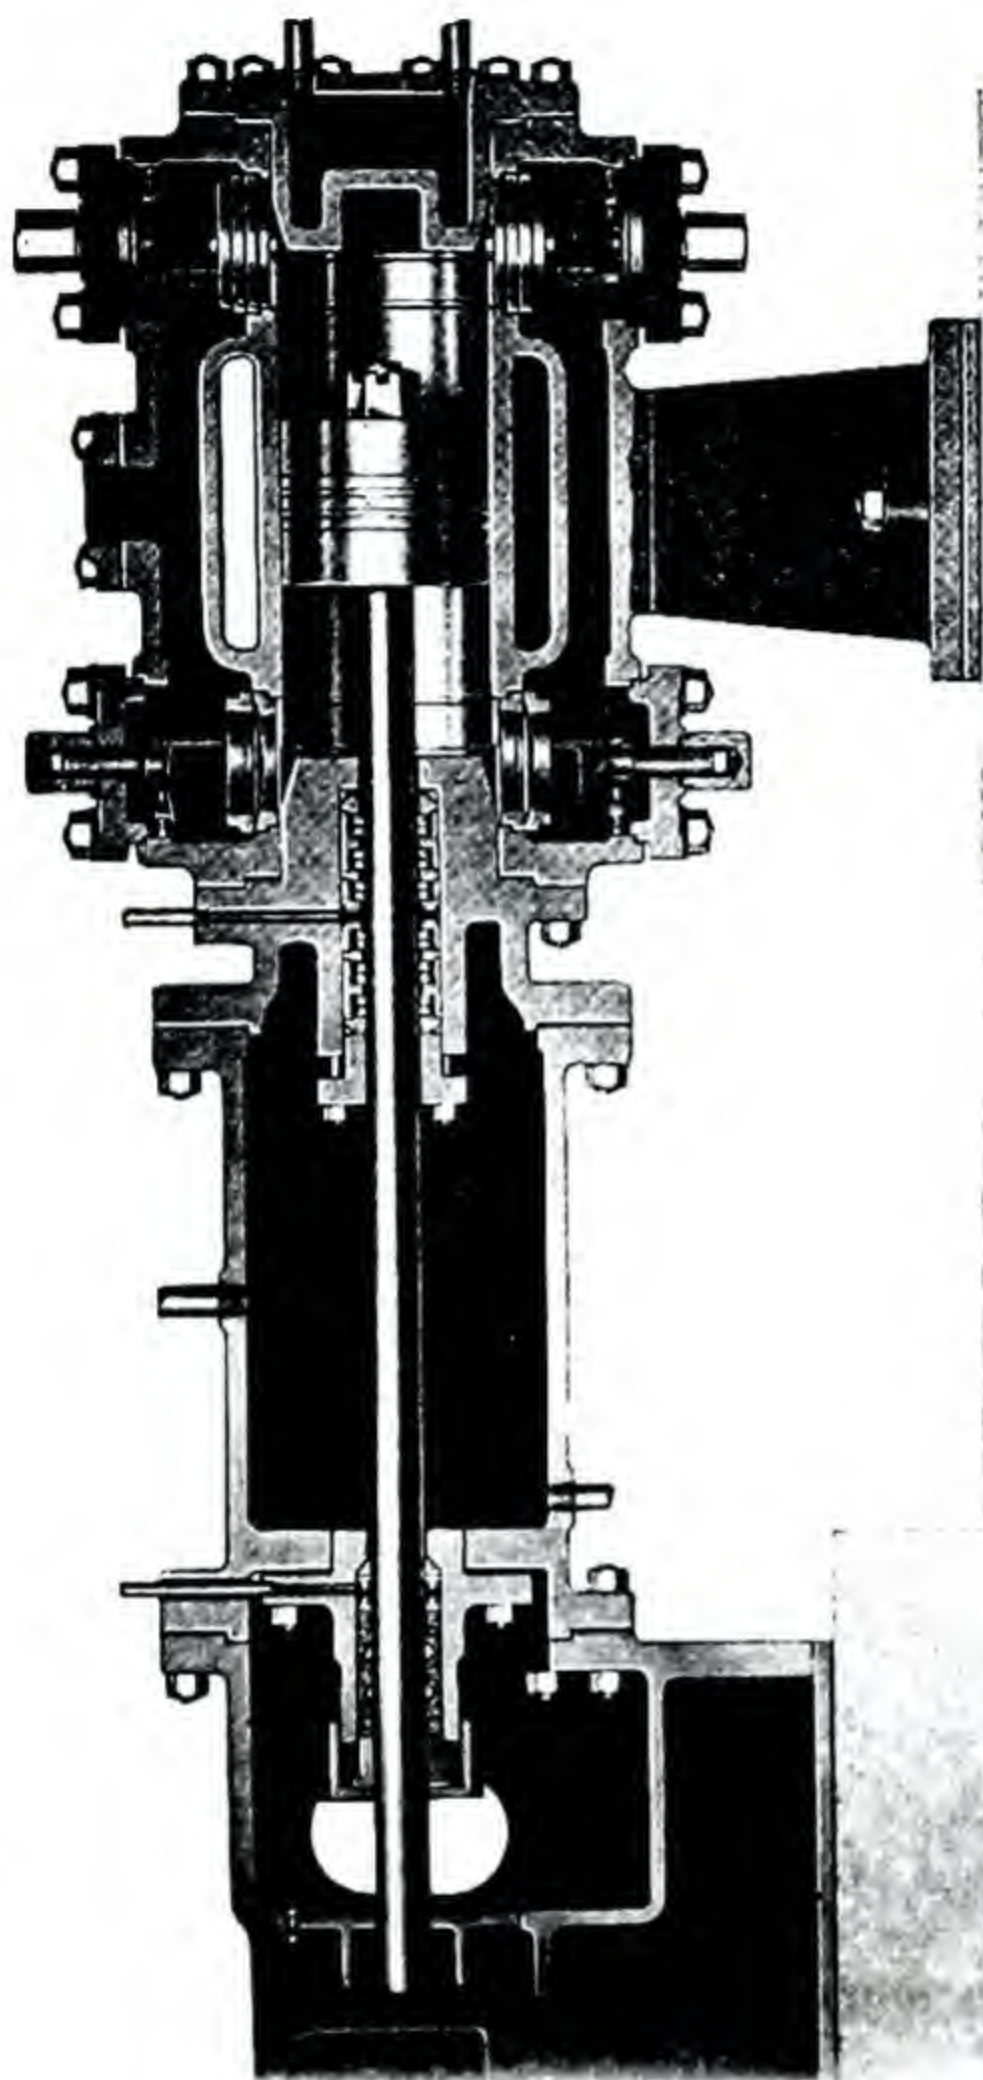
Sectional View of a Worthington Feather Valve Ammonia Compressor Showing Double-Seal Stuffing Box.
